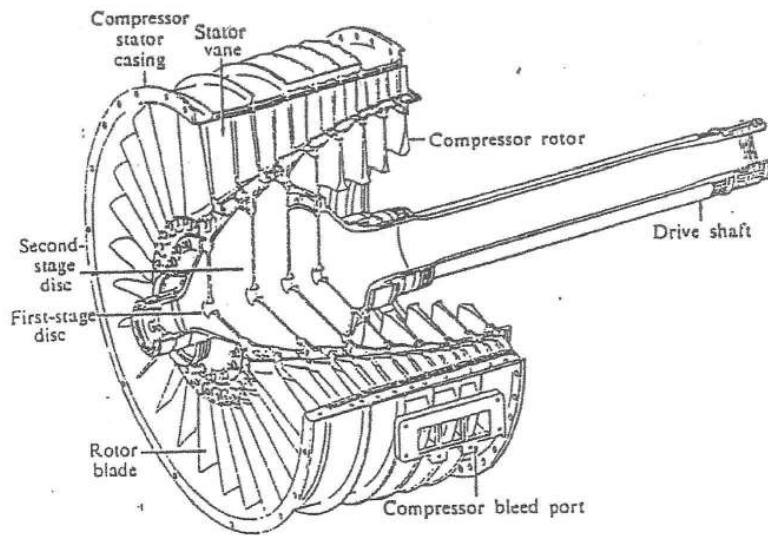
Cutaway sketch of a typical axial compressor assembly: the General Electric J85 compressor. (Courtesy General Electric Co.)
